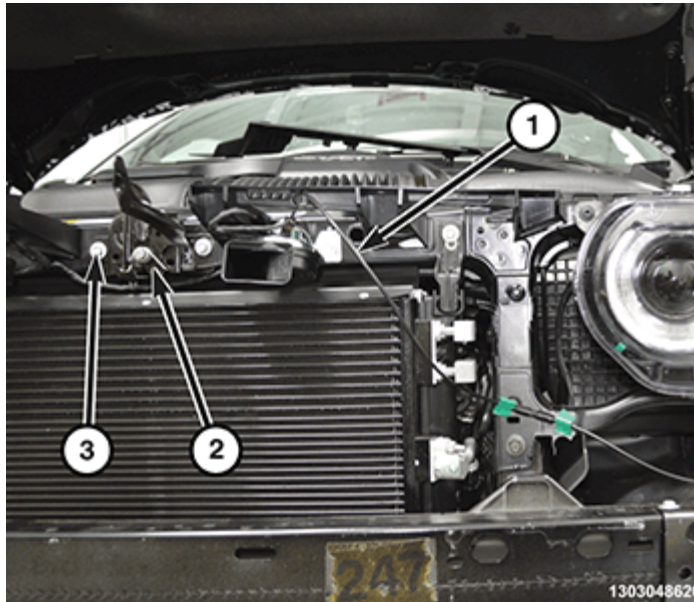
Latch Release, Cable Hood Latch & Bolt
